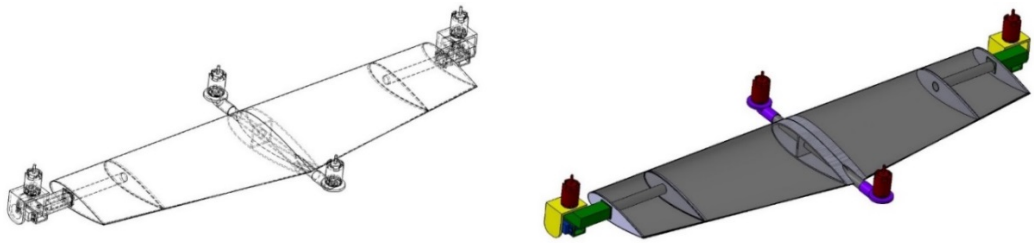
a) Dimensions and b) final assembly drawings in Solid Edge
